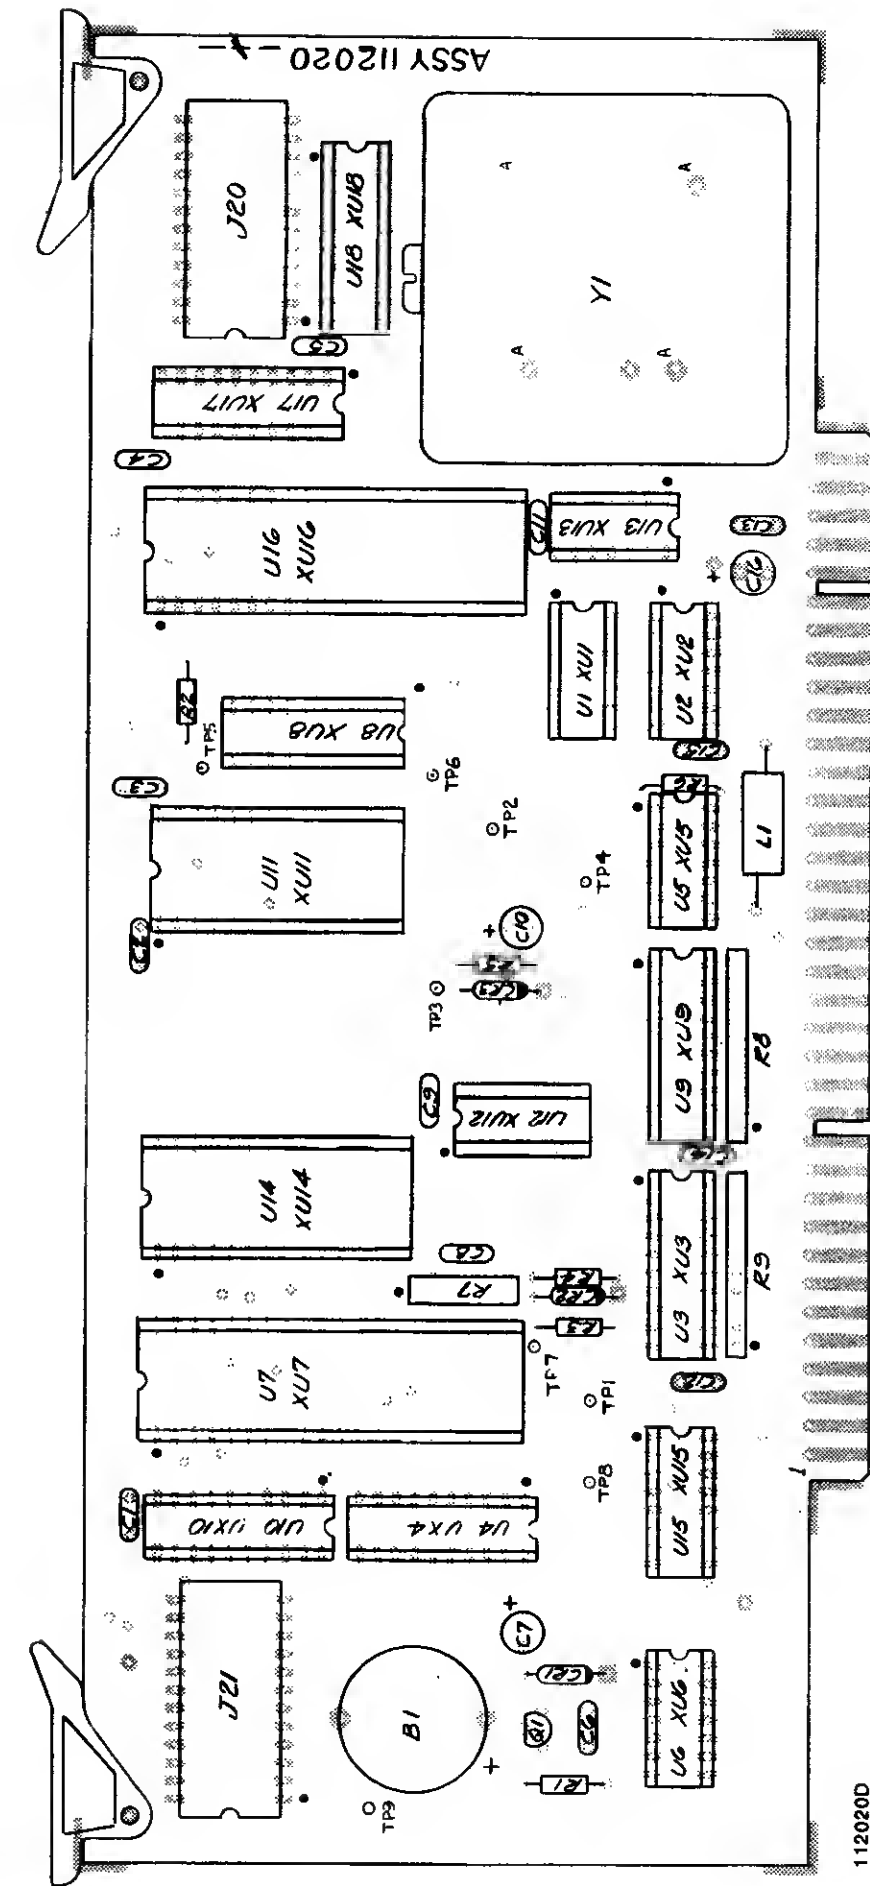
C.P.U Board A5 Parts Location Diagram
